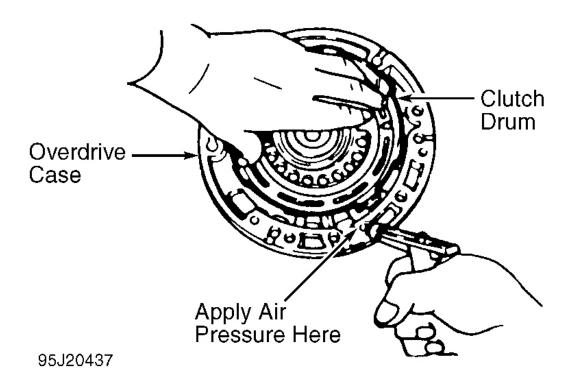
Removing Clutch Piston From Clutch Drum On Forward Clutch Assembly Courtesy of ISUZU MOTOR CO.
